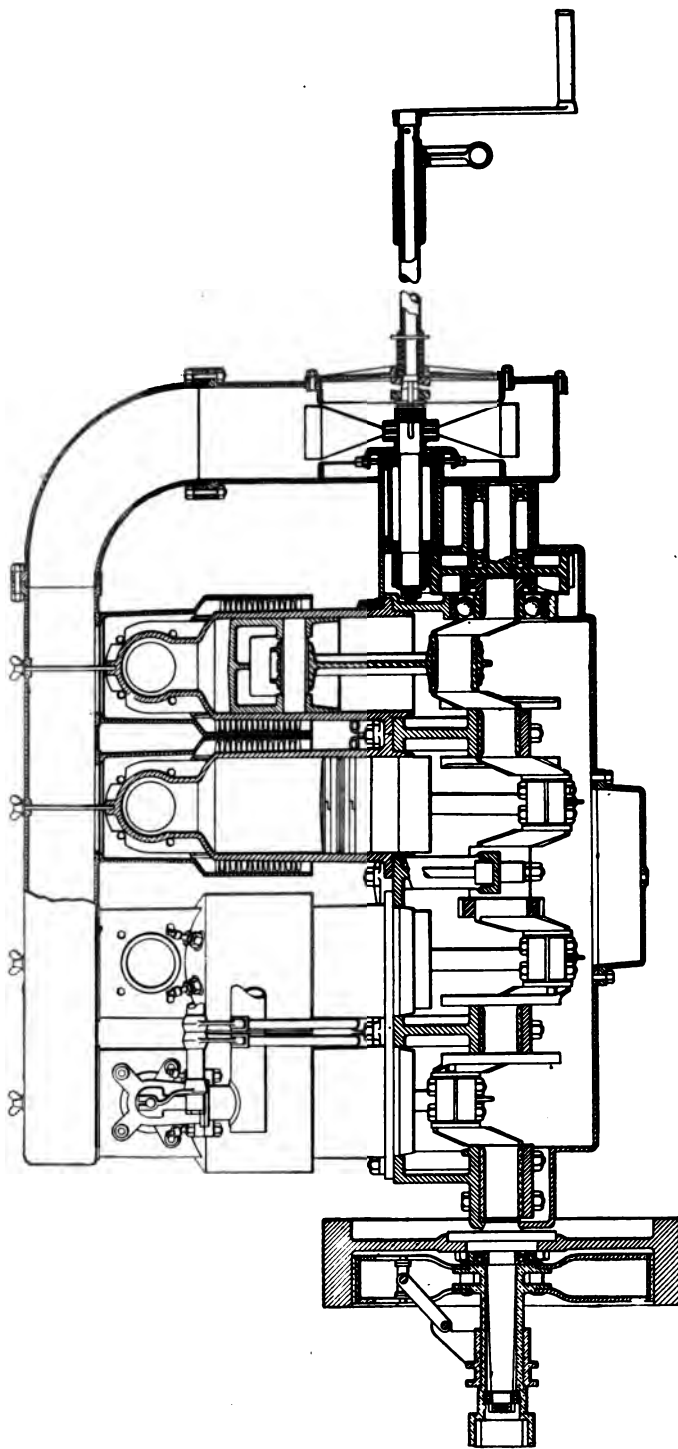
Sectional View of Frayer-Miller Engine Cooled by Centrifugal Air-Blower.
